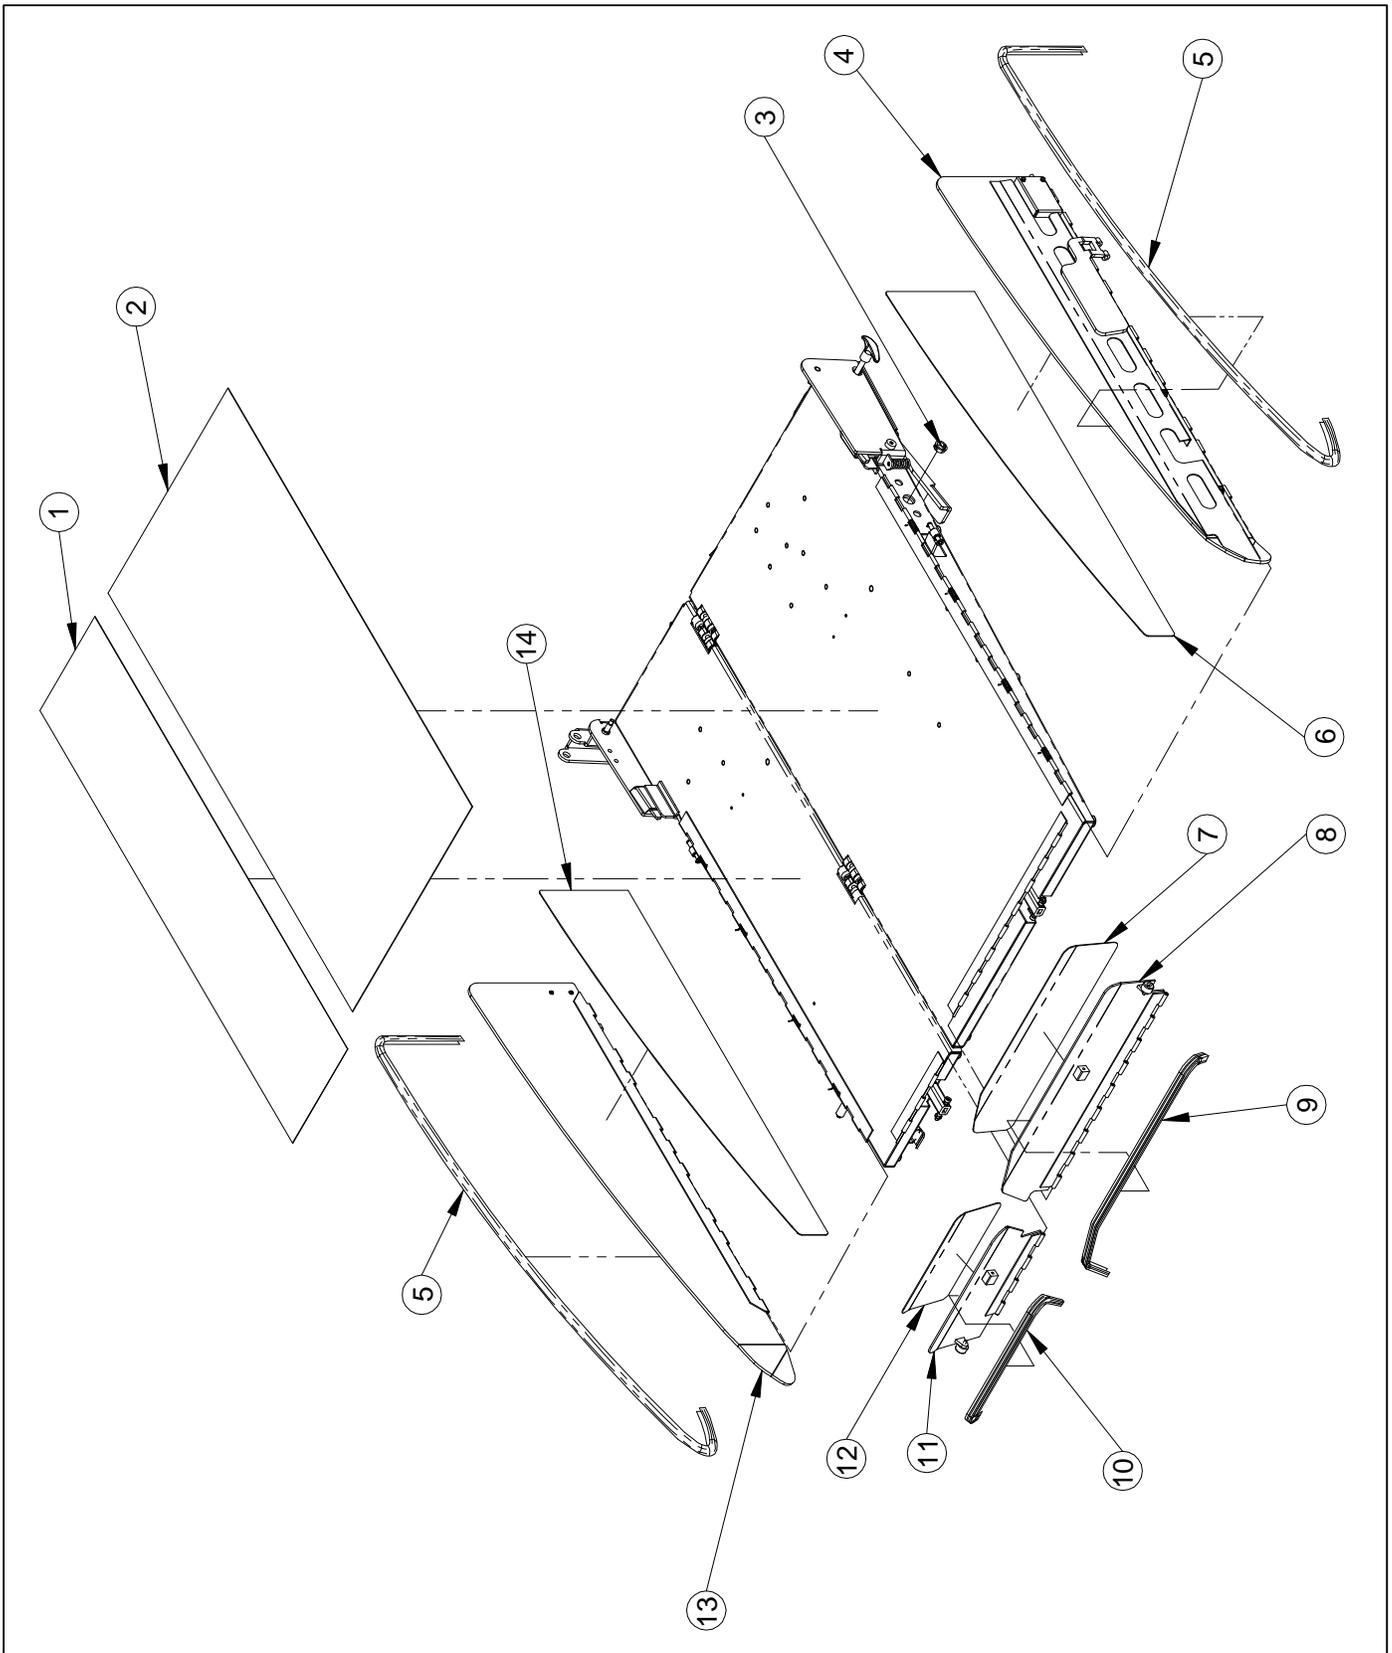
FRONT PLATFORM ASSEMBLY – SHEET 1
